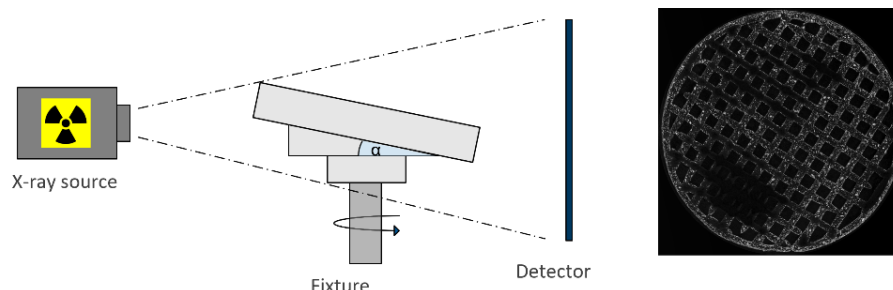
Scheme of  $\mu$ CT images being taken of printed inserts in customized sample holder.
